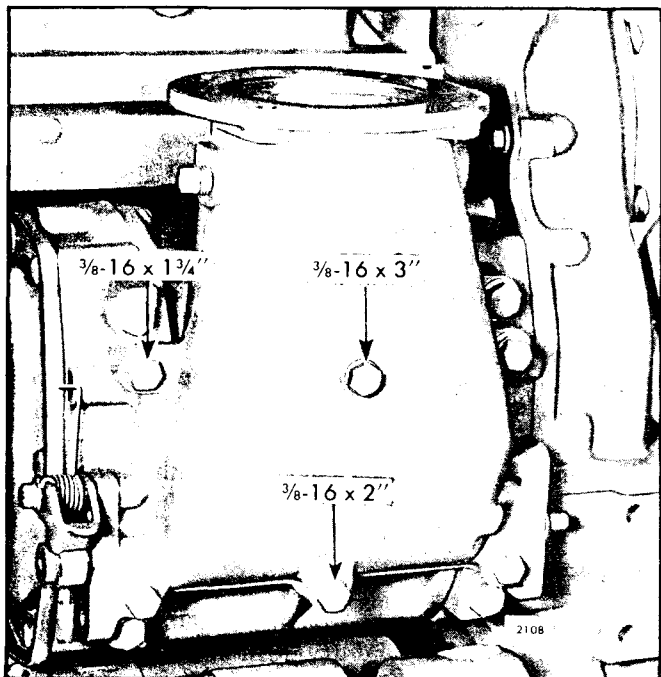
Location of Air Shut-Down Housing Mounting Bolts (In-Line Engines)
